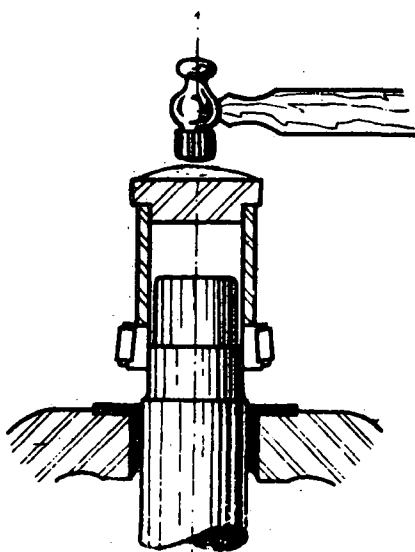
In the vice with the aid of a pipe, support and hammer.
